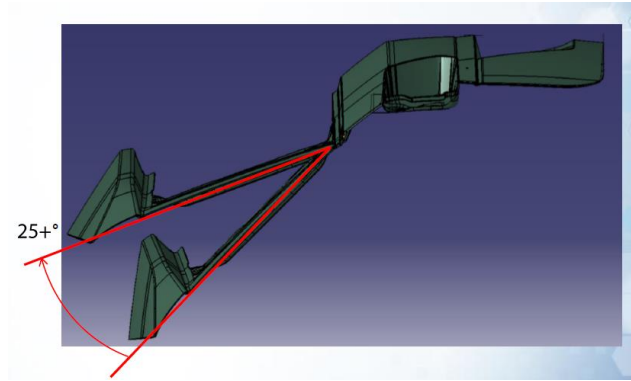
Optimized part tooling geometry with appropriate die position for Outer Panel, showing improved spoiler draft angle.
